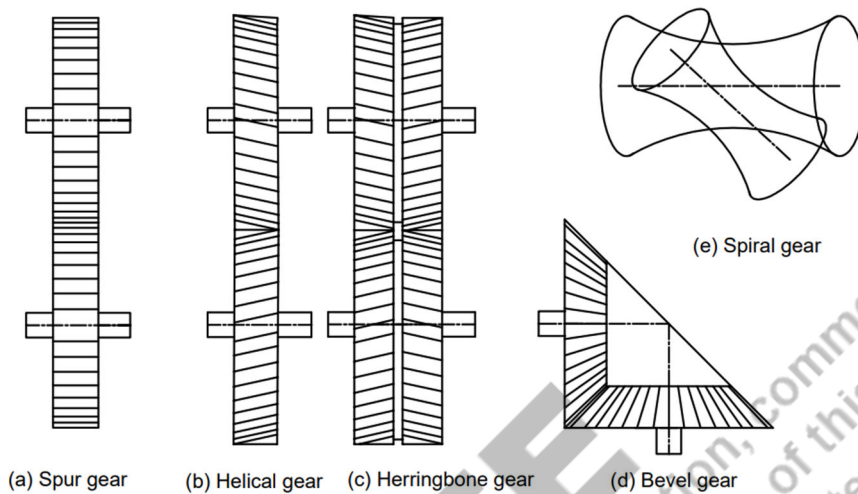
Types of Gears (a) Spur (b) Helical (c) Herringbone (d) Bevel and (e) Spiral.
